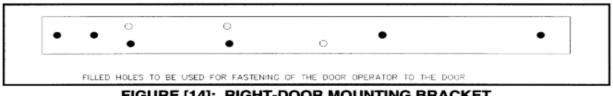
RIGHT-DOOR MOUNTING BRACKET
